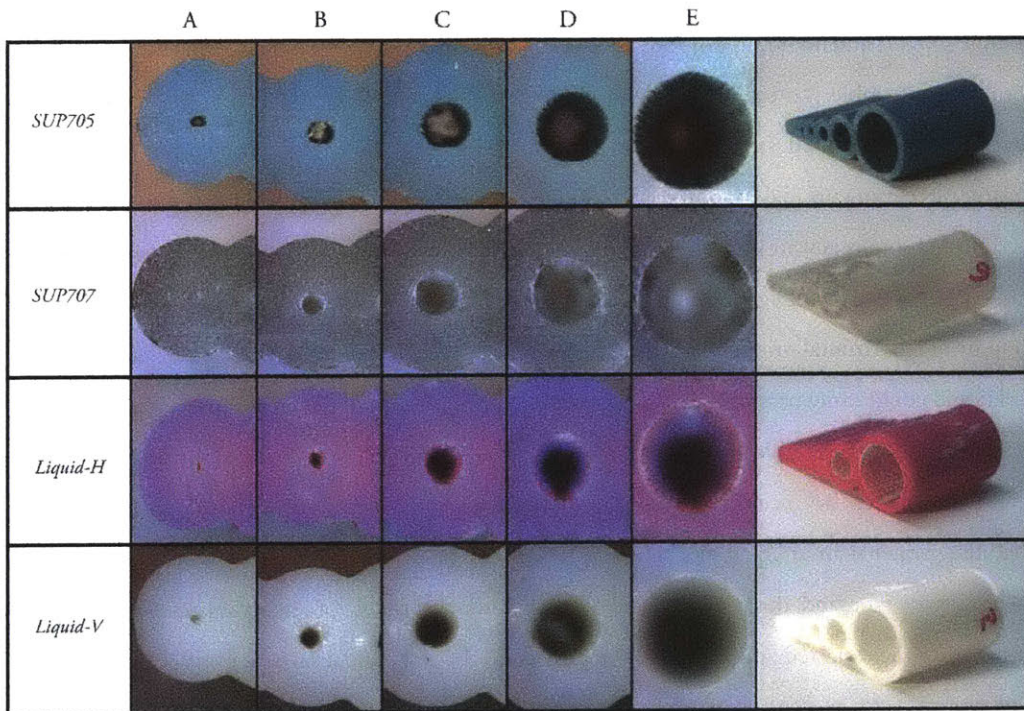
Representative optical images of test piece cross-sections that were printed using the three support material methods.
